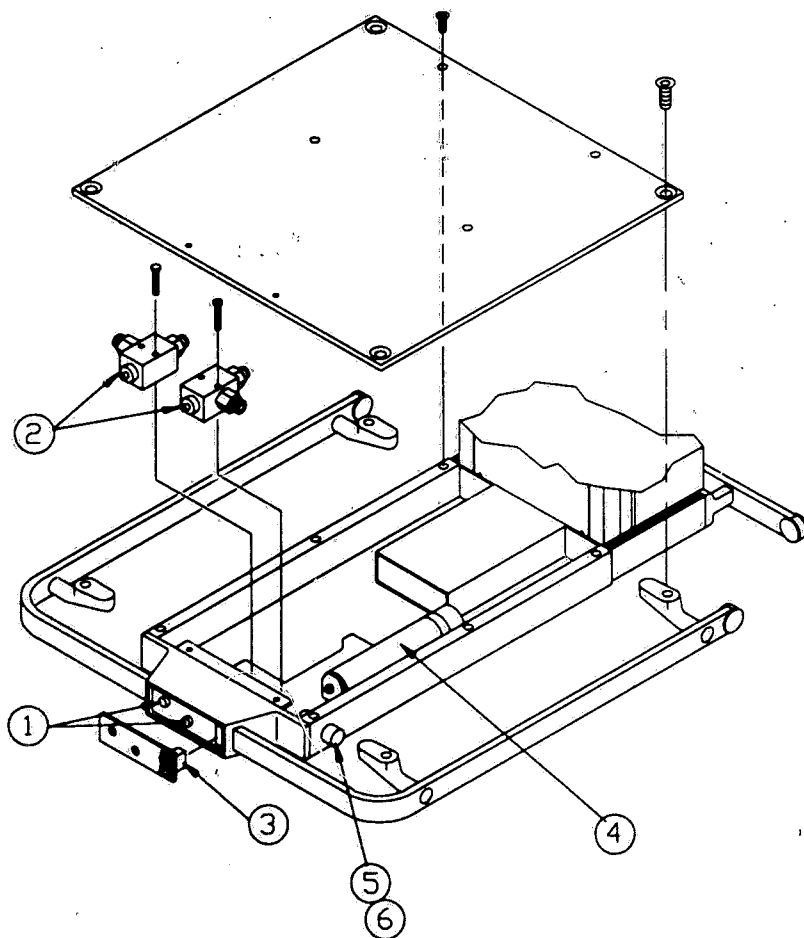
Control Assembly — Models 265, 425, 705M and 905M
